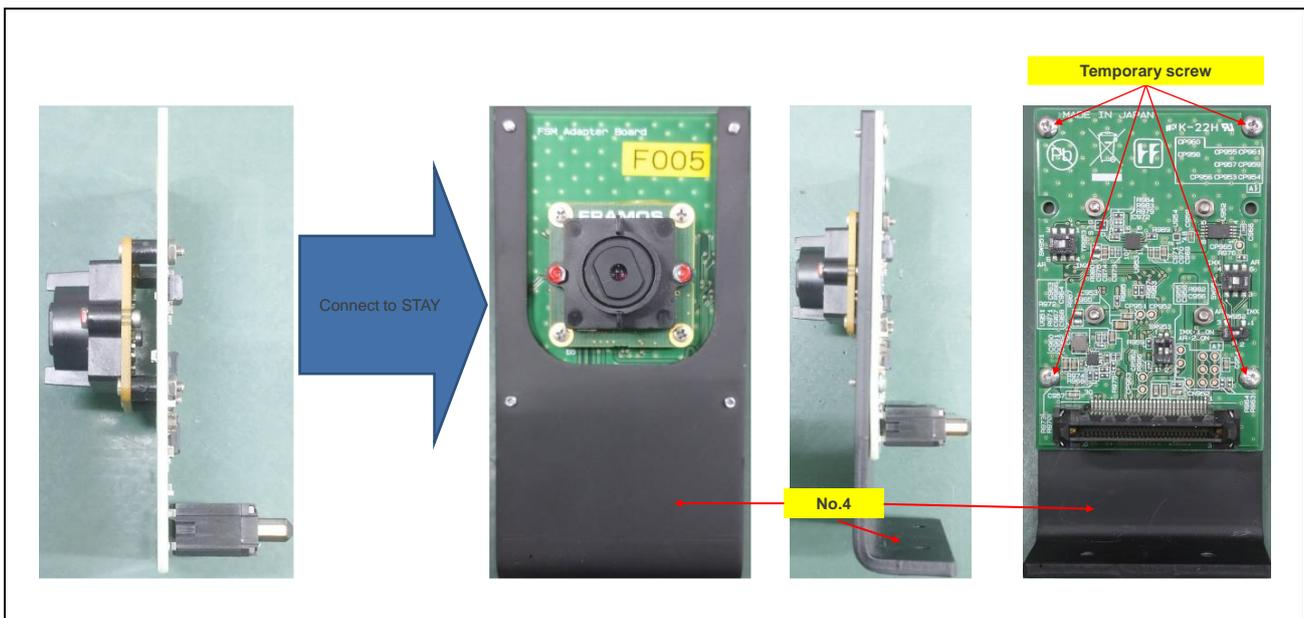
Connect FSM Adapter Board to Stay (FSM-IMX462)
